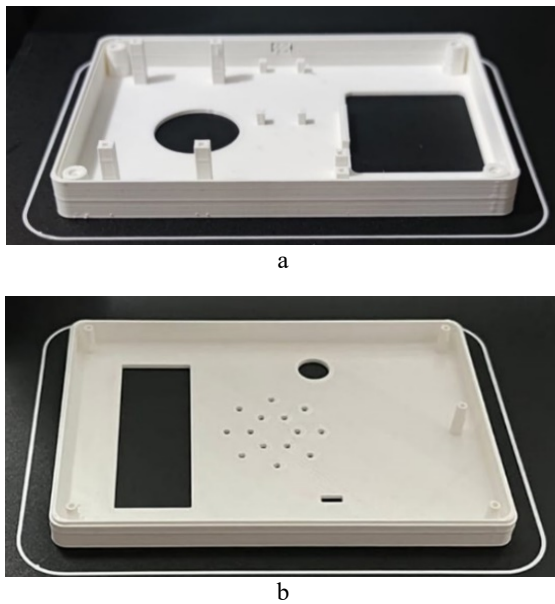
The additive manufacturing process of the device casing: *a* – Printed bottom casing device; *b* – Printed top casing device.
